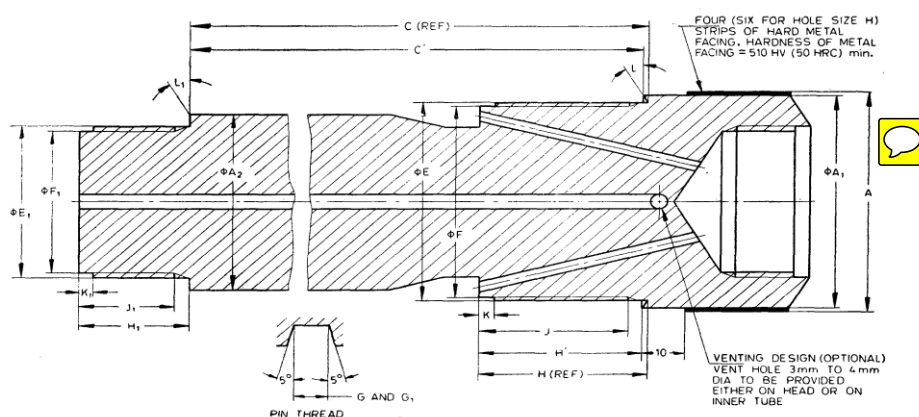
'WT' DESIGN DOUBLE TUBE CORE BARREL — REAMING SHELL
